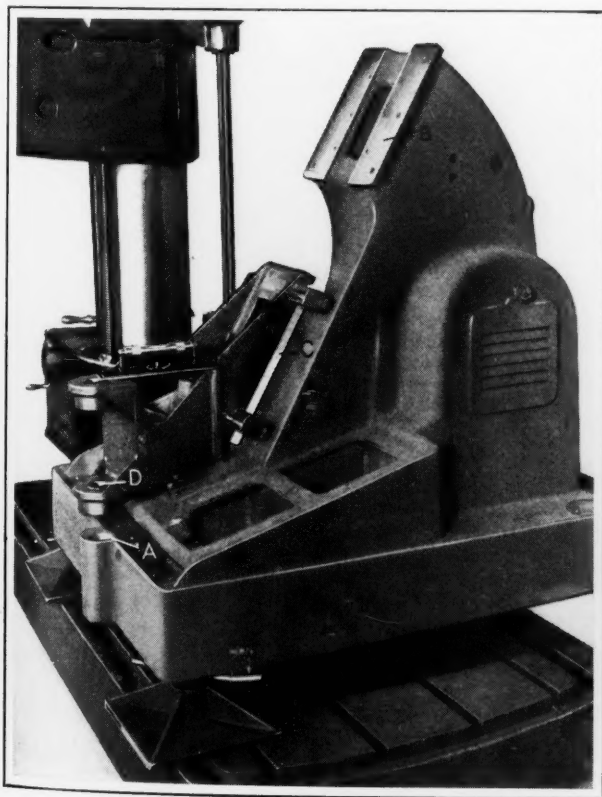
Fixture for Boring Hole in Automatic Threading Machine Bed, with Level in Place
